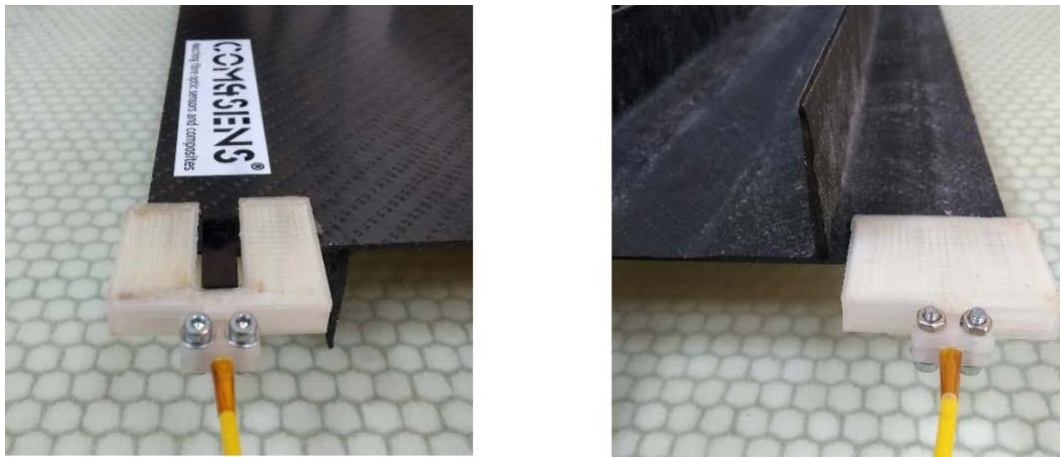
Camera images of a 3d printed bracket to reinforce the SWW connection on a CFRP test-piece with embedded sensors
